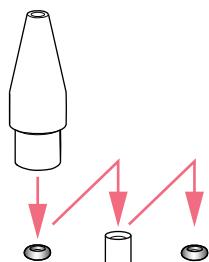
Cross-section of the grip head with correctly inserted o-rings and distancing sleeve
